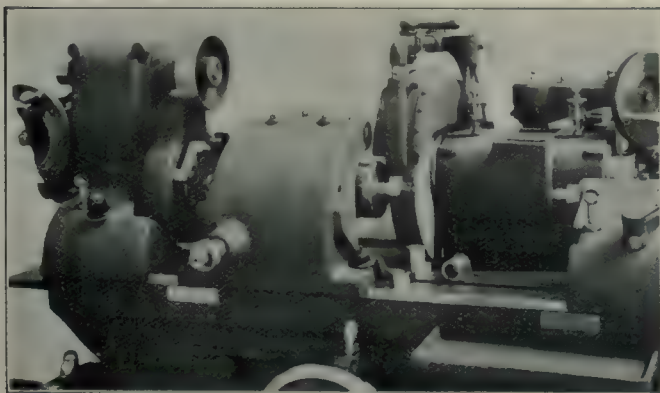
Working Side of a Landis Grinder With New Cam Grinding Attachment.
